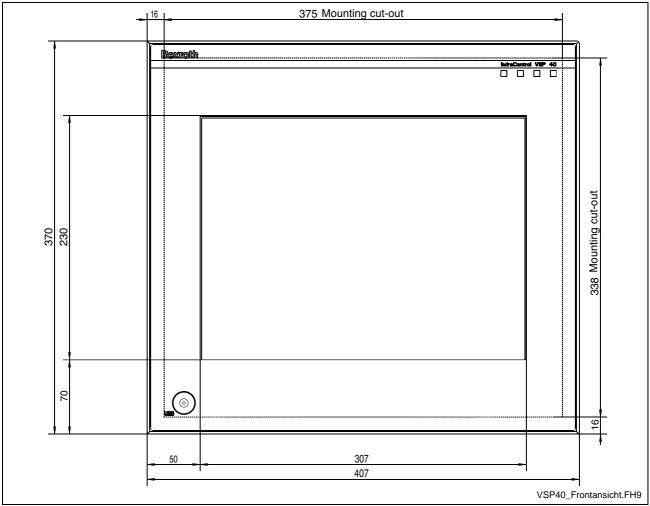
Dimensions – Front panel VSP 40.1DE
